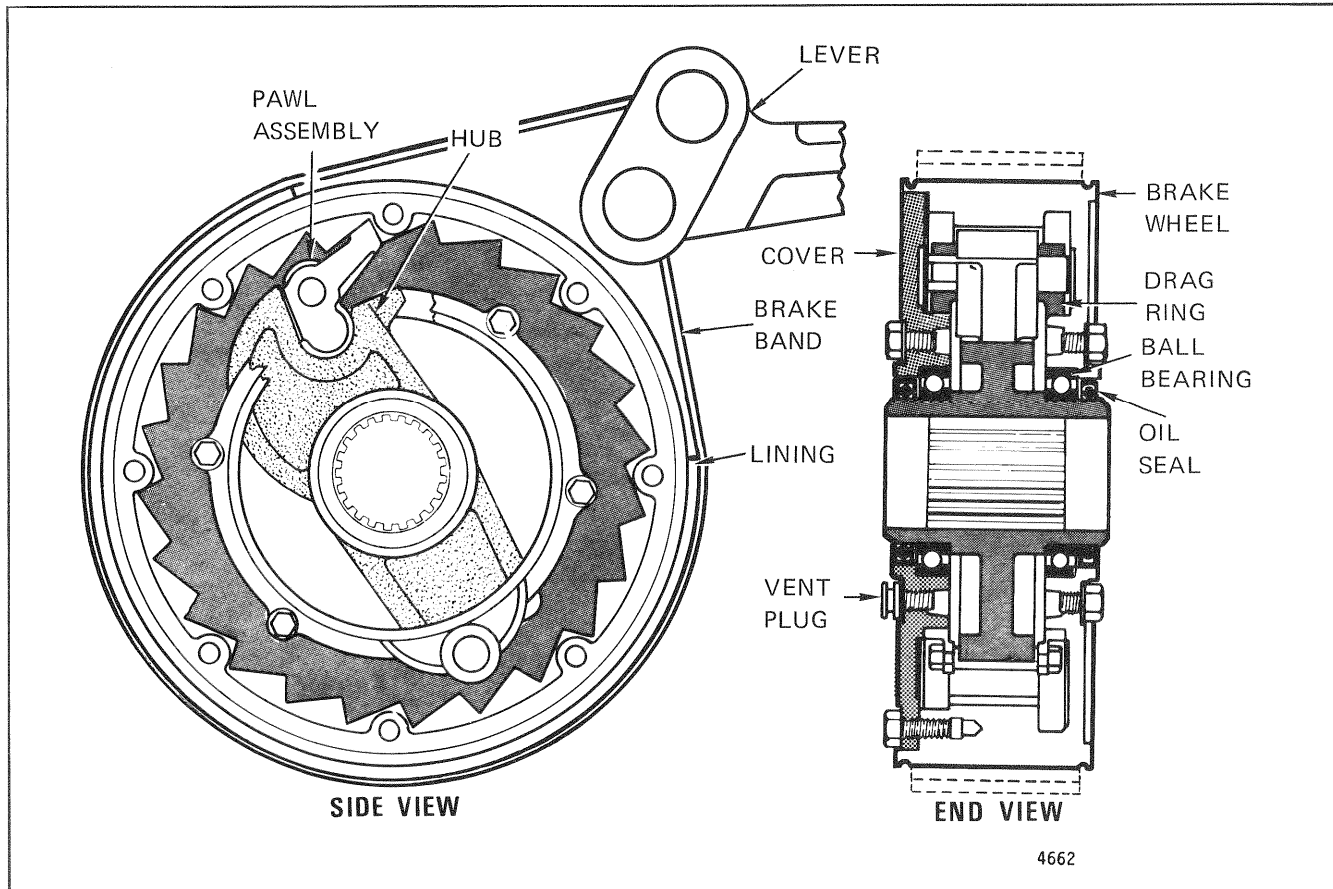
OPTIONAL AUTOMATIC BRAKE ASSEMBLY
